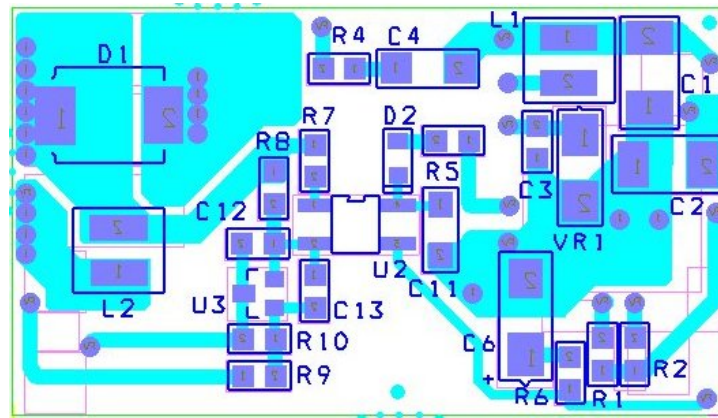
Bottom Side, SMT Printed Circuit Layout (Top View).
